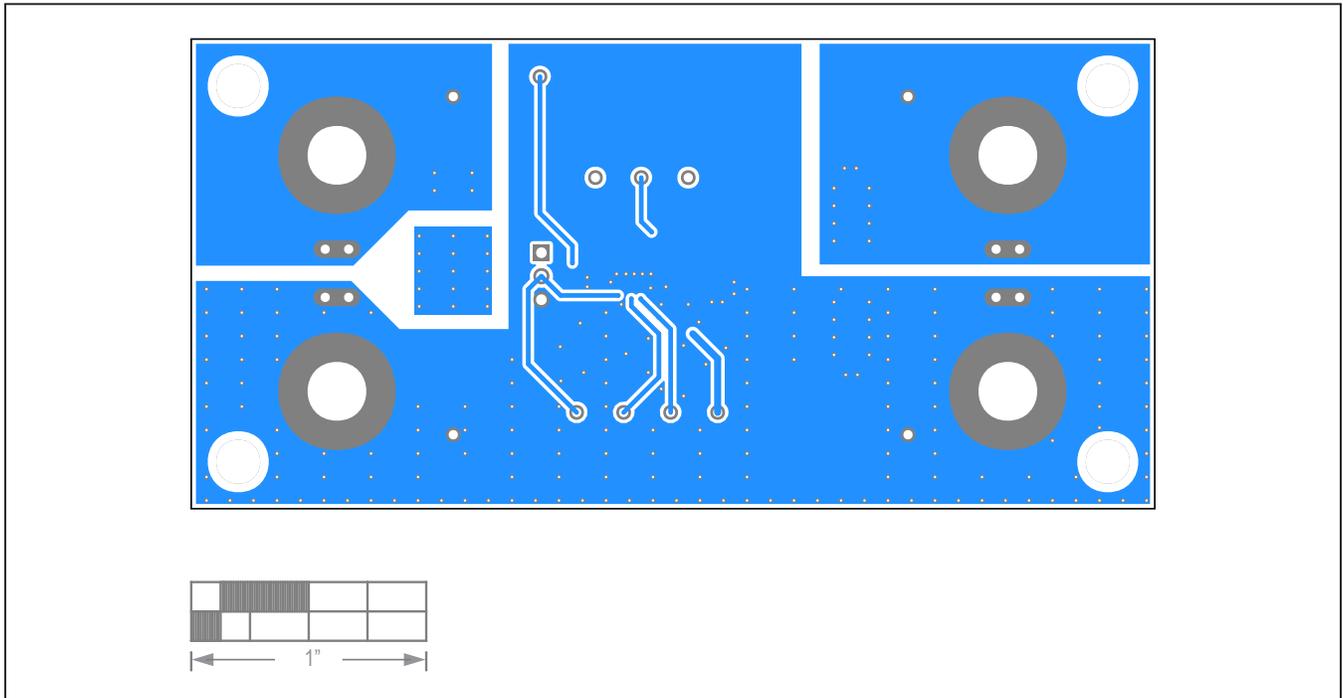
MAX16173 EV Kit PCB Layout—Bottom Side
